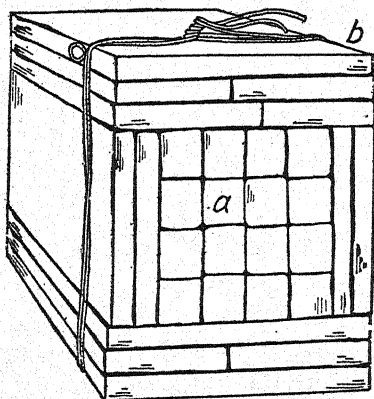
Bundle of wrought-iron pieces ready for reheating and welding.
